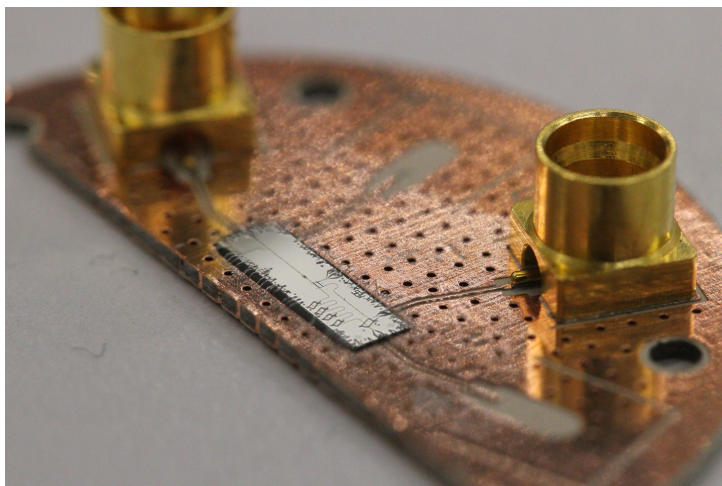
A sample glued and wire bonded to one half of a PCB with SMP connectors for the coaxial lines.
